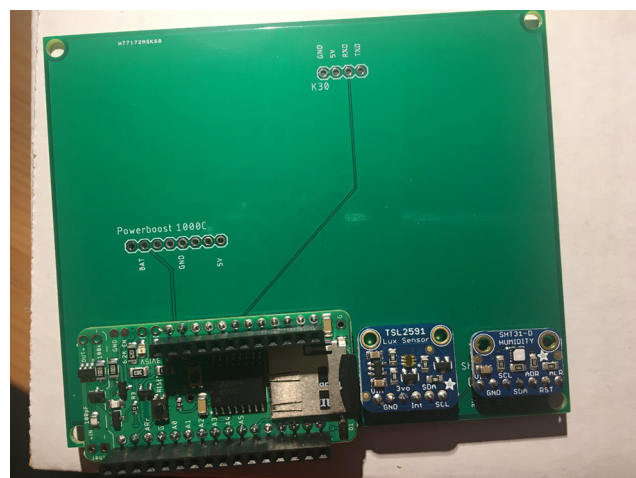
Top view after soldering the Temperature and Relative Humidity Sensor to the PCB.
